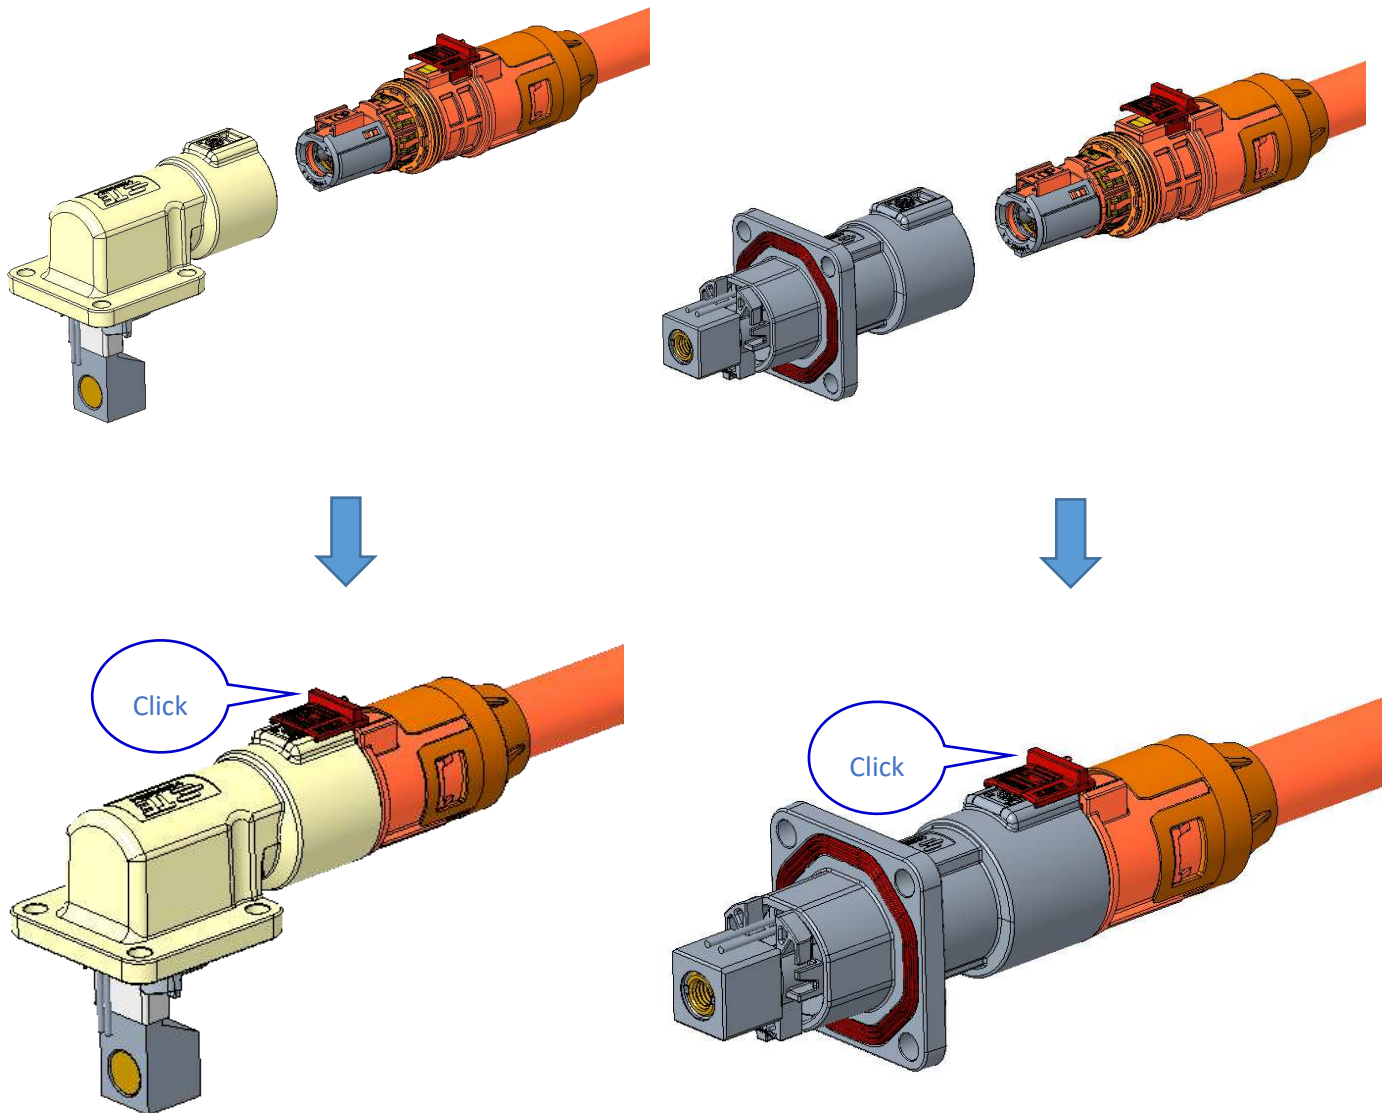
Header assembly and plug assembly mating condition (Tool access)
